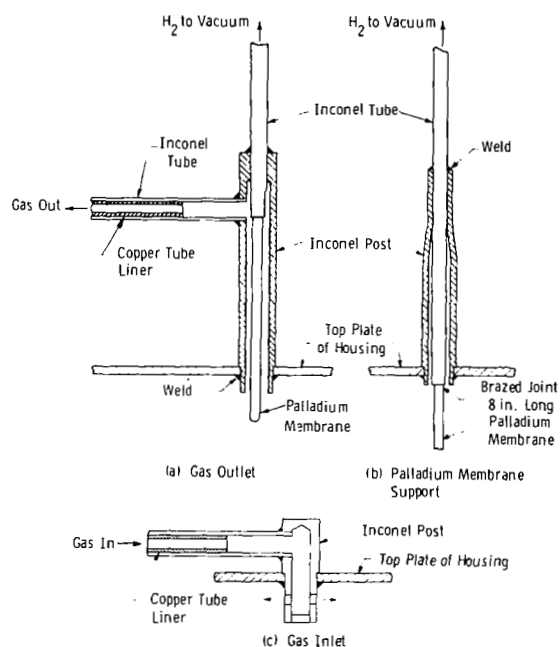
Attachment of palladium membranes and gas lines to housing of electrolysis unit
